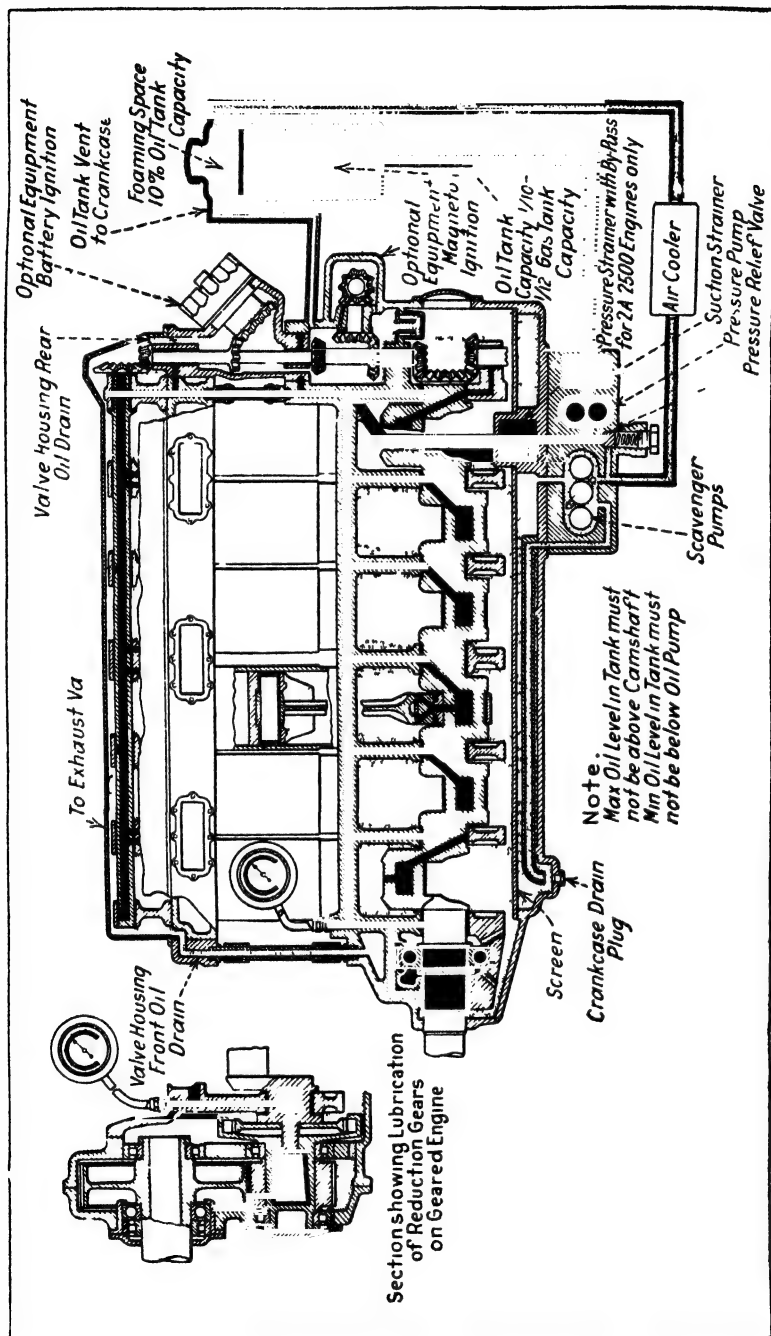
Oiling System of Packard Aircraft Engines is Typical of Latest Practice in Lubrication of Motor Parts. Two Pumps are Used, One to Force Oil to All Bearing Points, the Other to Draw it from the Sump at the Bottom of the Crankcase.
